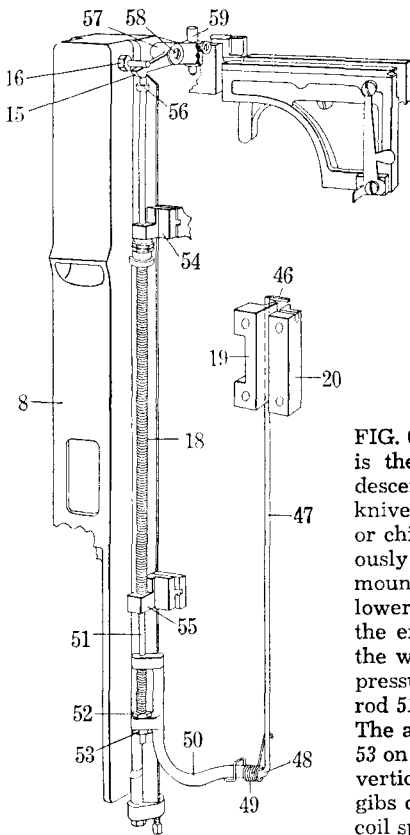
View of wiper for the trimming knives. 46 is the "flag" which, when the first elevator slide descends, passes over the edges of the trimming knives 19 and 20 to wipe them clean of any shavings or chips of type metal trimmed from the slug previously trimmed by them. This "flag" or wiper 46, is mounted on the upper end of the vertical rod 47, the lower end of which is free to turn in a bearing 48 on the end of the arm 50. The torsion spring 49 keeps the wiper 46 against the knife edges with a uniform pressure. The arm 50 is adjustably held on the slide rod 51 which passes through two lugs on the arm 50. The adjustment is provided by two lock nuts 52 and 53 on the threaded end of the rod 51. The rod 51 slides vertically in bearings 54 and 55 on the right-hand gibs of the first elevator slide. The long compression coil spring 18 returns and holds the slide rod 51 to its
